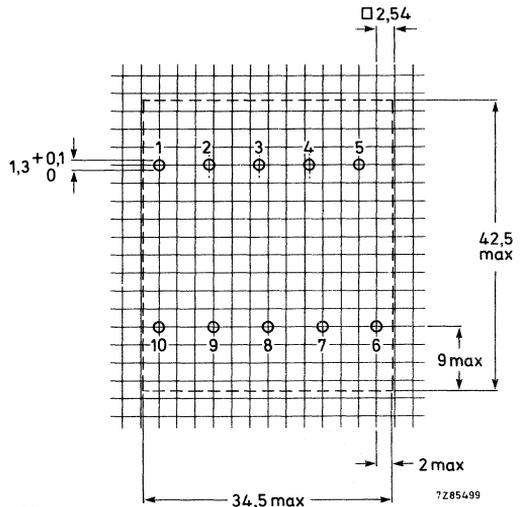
Hole pattern for mounting on a printed-wiring board, viewed from the solder side.
